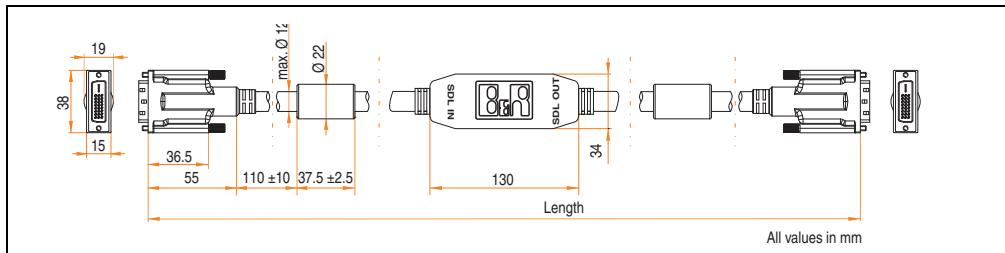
Dimensions - SDL flex cable with extender 5CSDL.0x00-13
